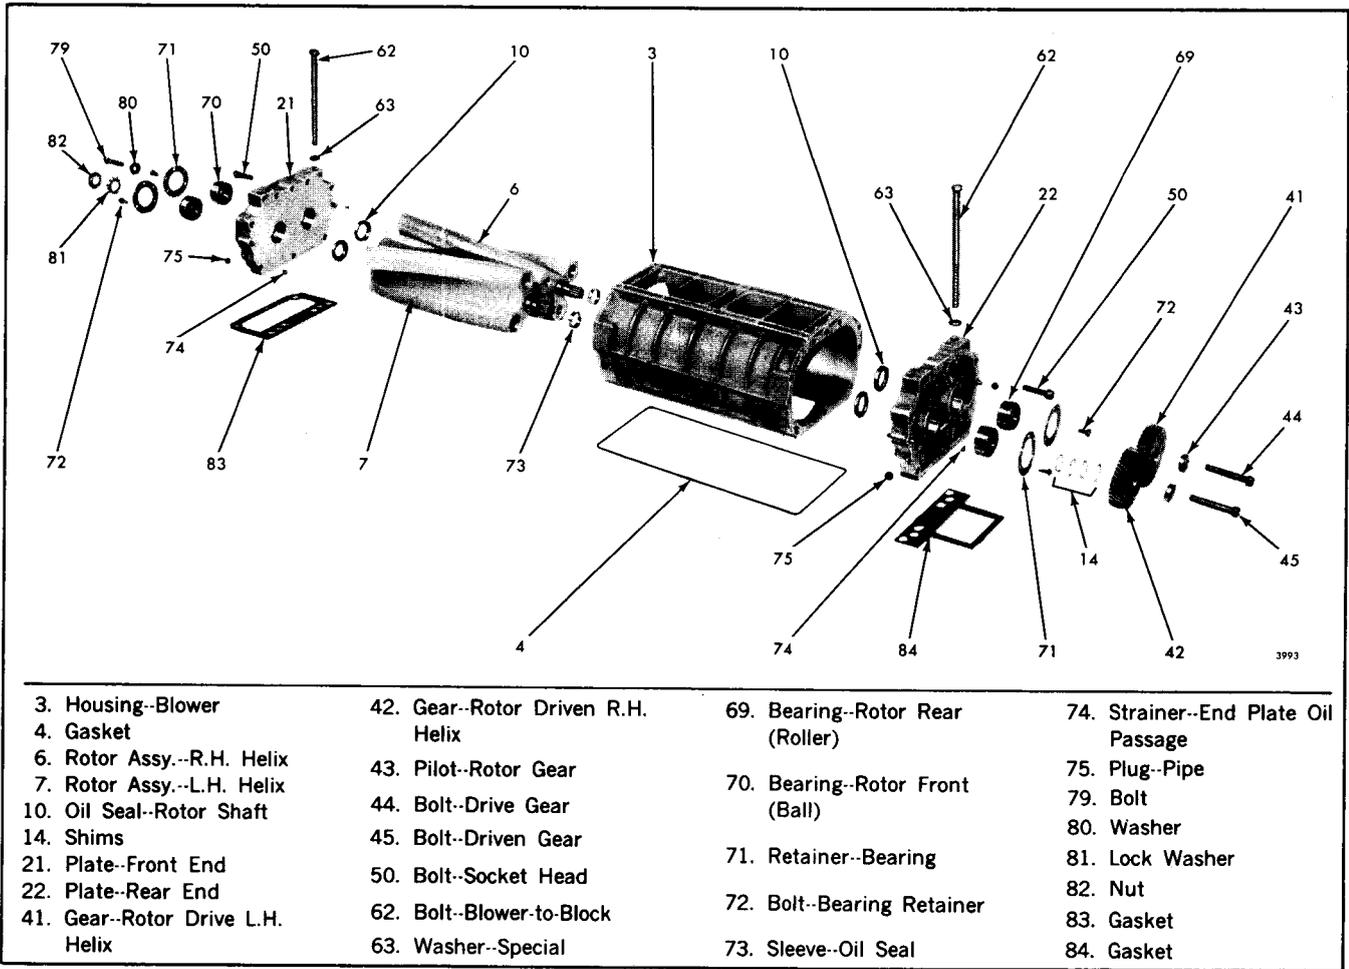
Blower Details and Relative Location of Parts (8V-53) (Former Blower)
